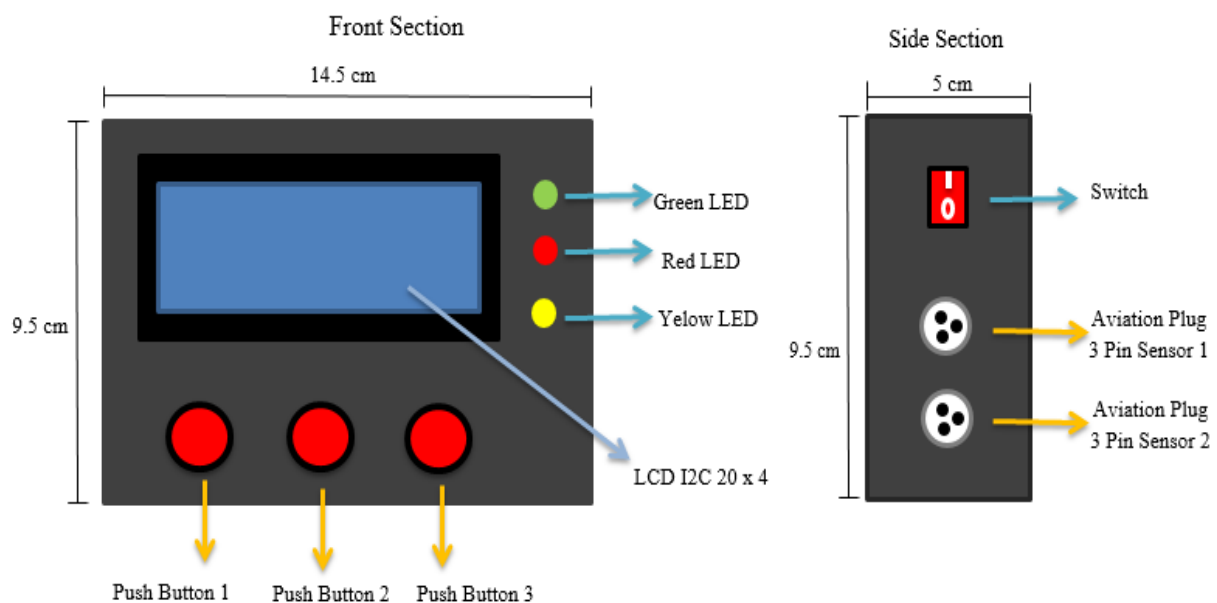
Design cover front section of automatic tube counting device and design cover side section of automatic tube counting device
